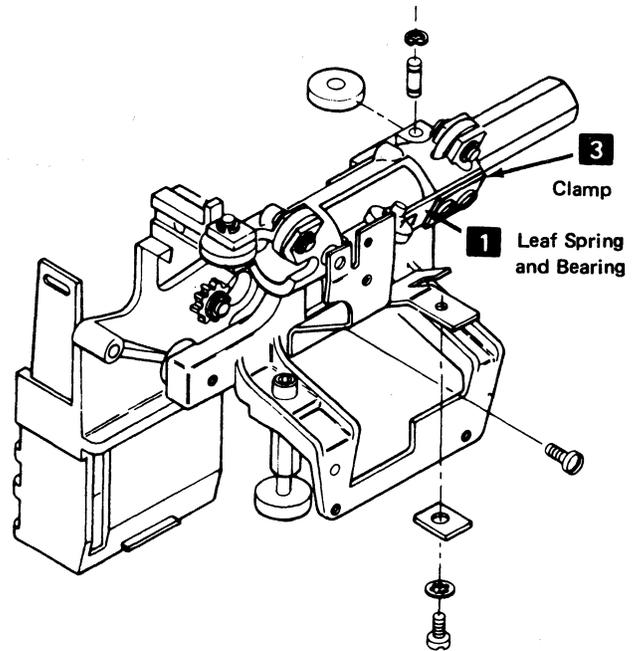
Carrier Leaf Spring and Bearing Removal
